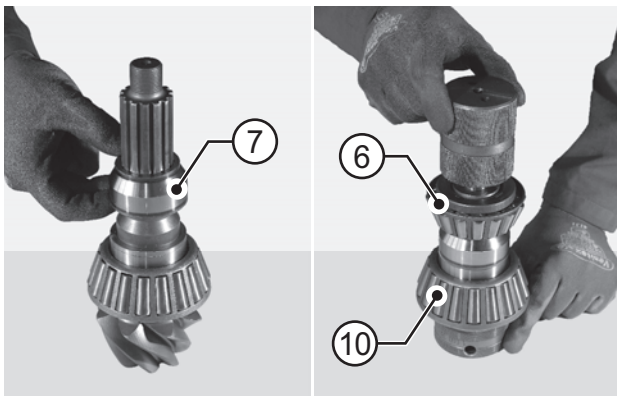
Remove the comparator and take out tool and bearing cone kits from the main body. Reinstall every part, also introducing a spacer (7) and thicker calibrated spacer between bearing cones (10) and (6). Tighten the entire pack by hand.
